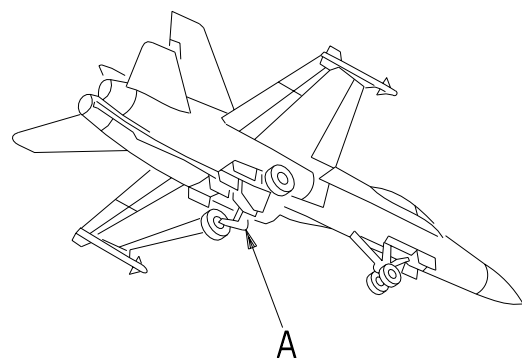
MLG Lever Axle Corrosion Inspection Areas (Sheet 1)
